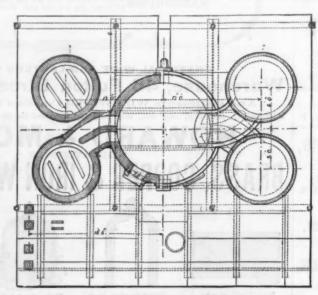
Horizontal Section and Plan of Regenerative Furnace.
